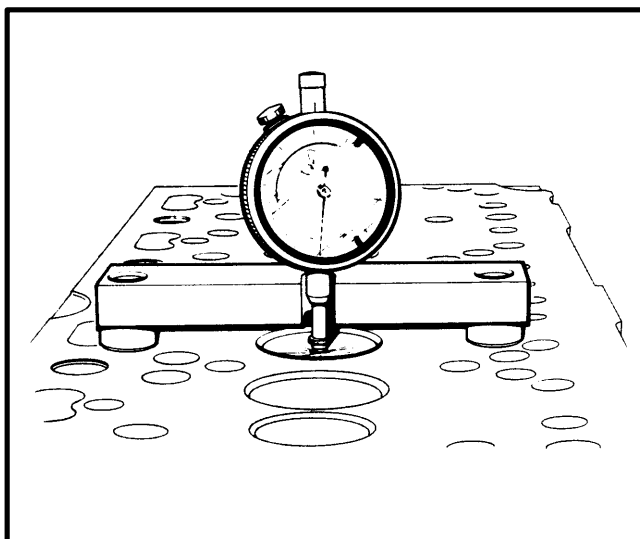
CHECKING THE DEPTH OF THE VALVE HEAD
